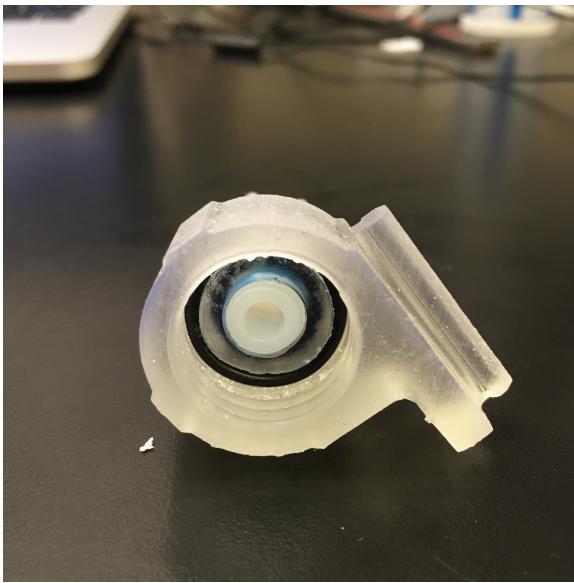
Bag Cap v10 printed by an SLA printer with translucent resin. The compression fitting was threaded with Loctite and an O-Ring was pressed into the bottom O-Ring gland.
